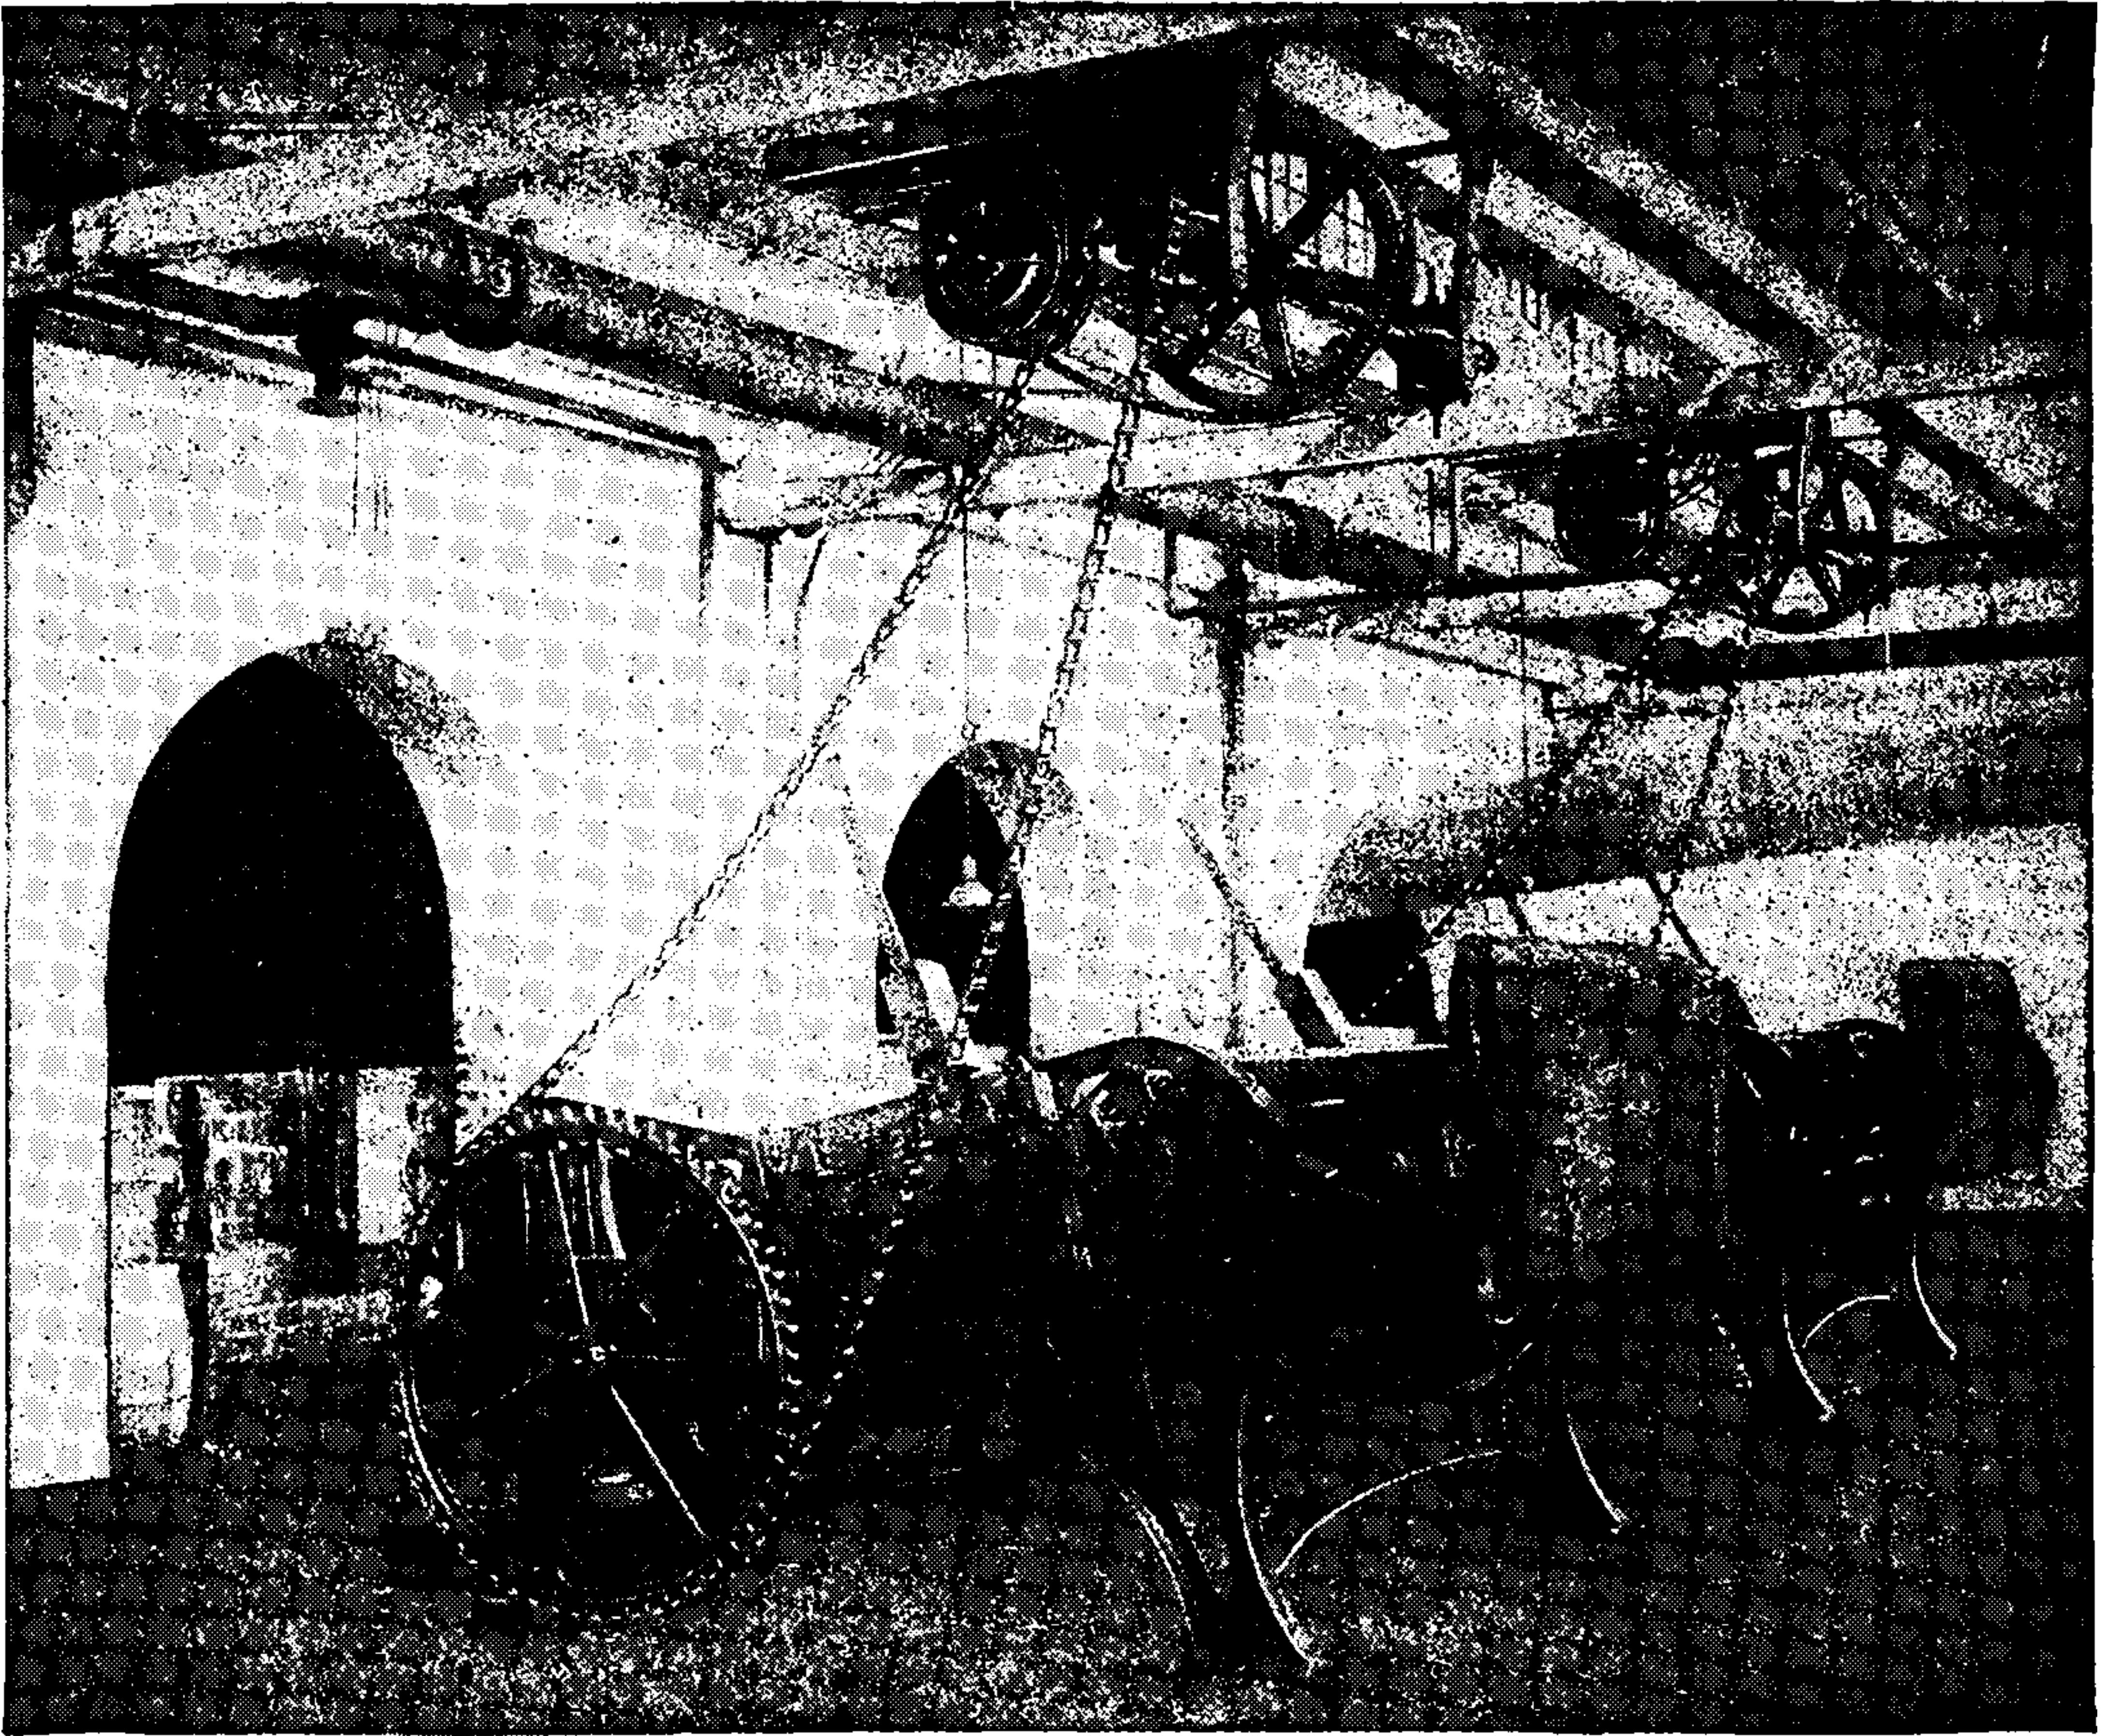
Motors Driving Jack Shafts Through Silent Chain
